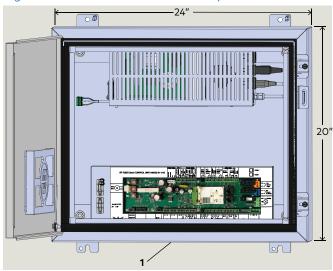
Motion Assist 360 power supply RX6001
